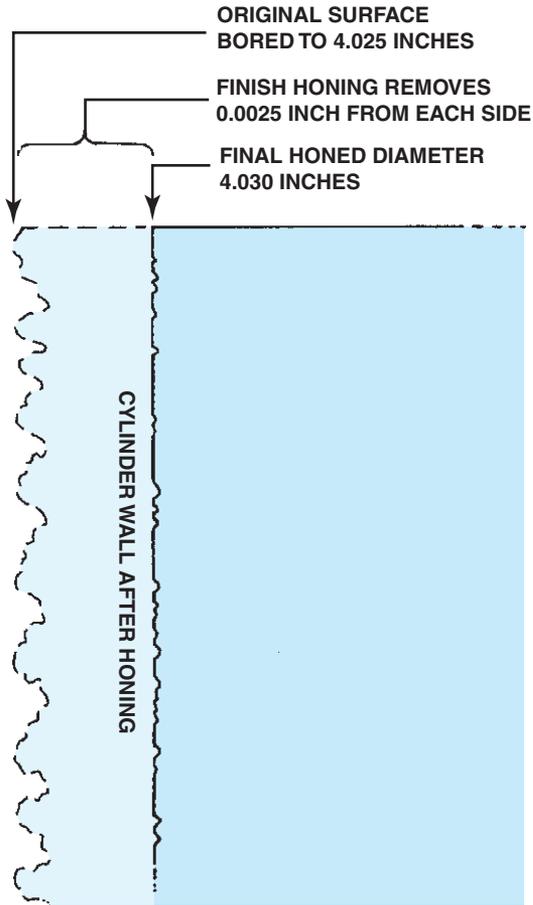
Honing enlarges the cylinder bore to the final size and leaves a plateau surface finish that retains oil.
